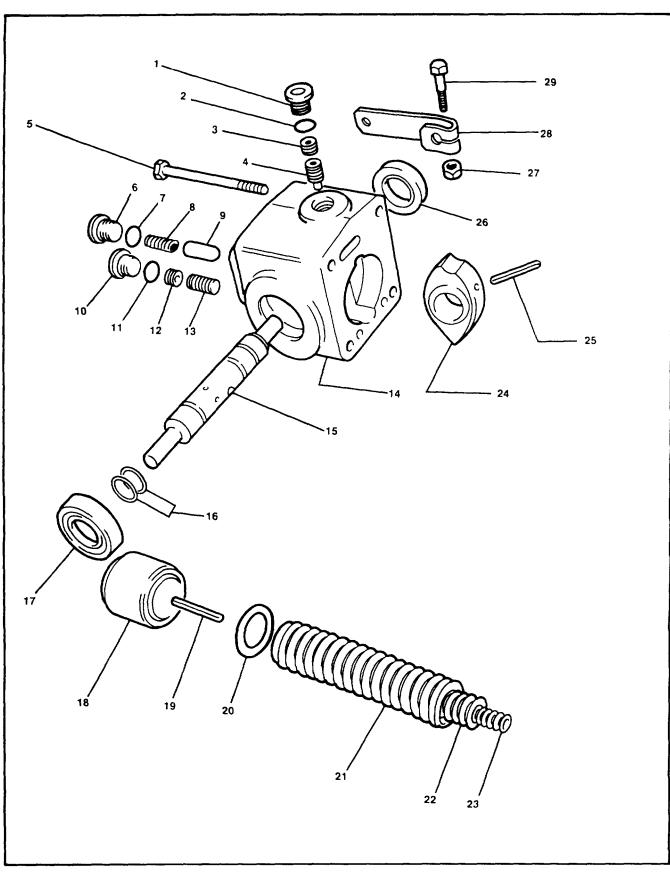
Trolling Valve Assembly 23505391-Exploded View
